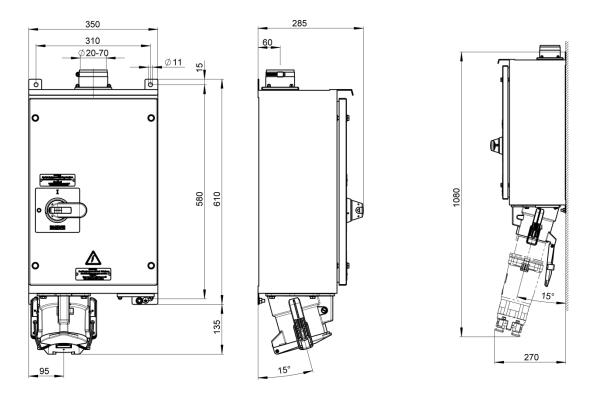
Dimensions Connector Unit with mechanical interlock CUMI C-Line (200A - 250 A) in mm
